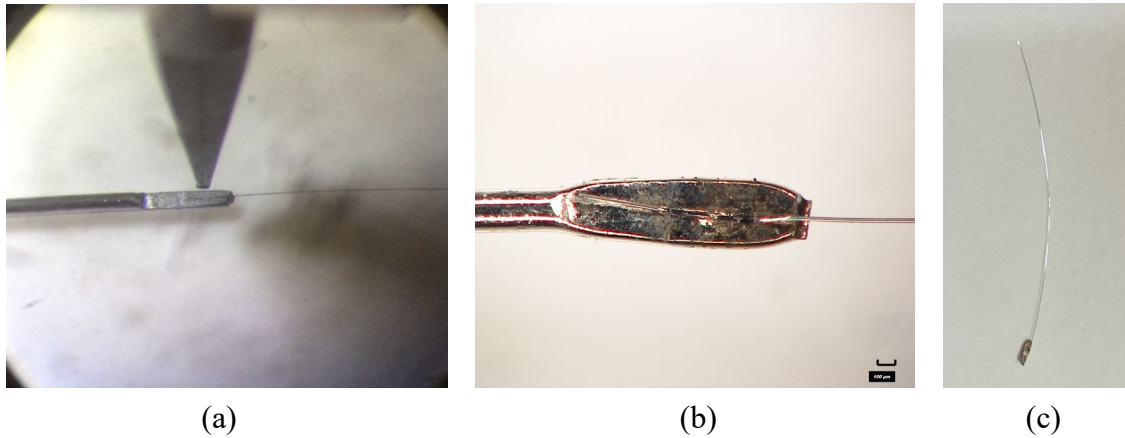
Fabrication steps of neural electrode using ultra-thin flexible Pt micro-wire. (a) Spot welding of micro-wire to a thicker wire for stability. (b) Spot welded micro-wire. (c) Trimmed wire assembly ready to be crimped in female socket pin.
